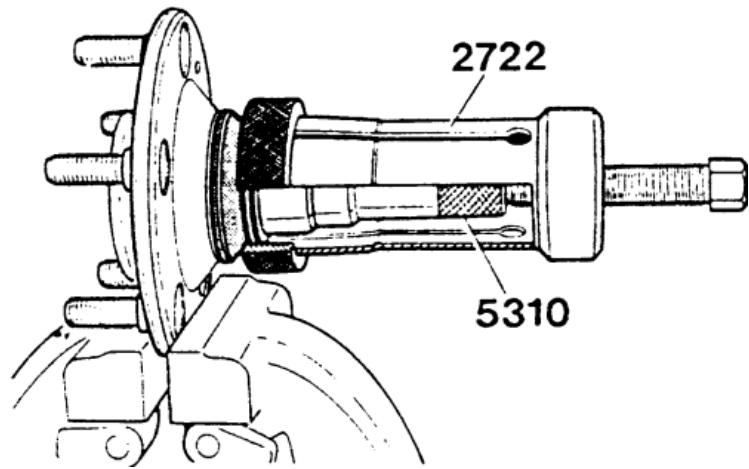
Removing the inner ring using puller 2722 or equivalent
